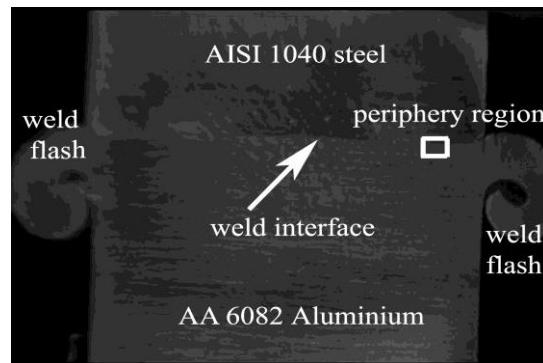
Macrograph showing the transverse section of the weld with interface
